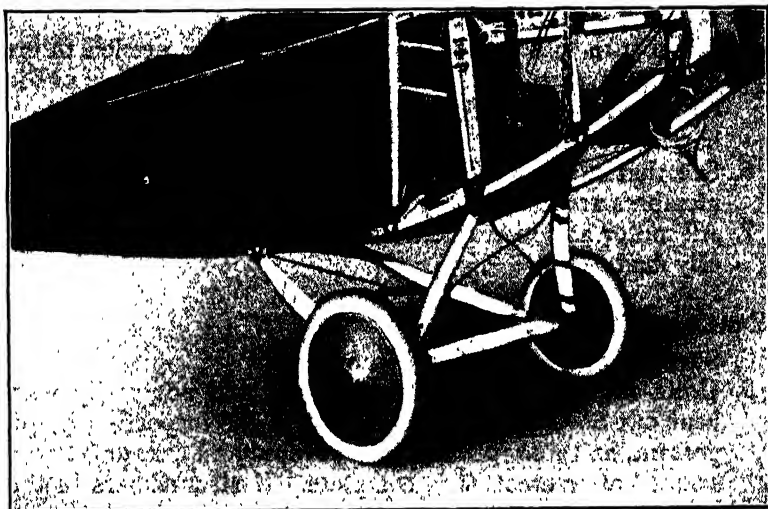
Landing Gear Installed on Fuselage of Training Biplane.
